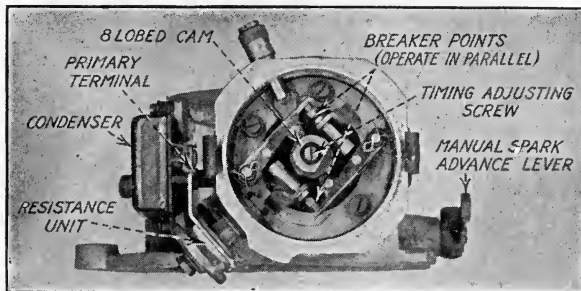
Deleo breaker mechanism used on Cadillac Eight, model 57.
